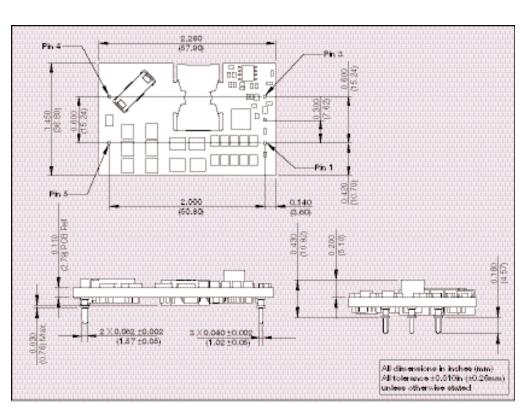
Horizontal Mechanical Drawing and Pinout Table
